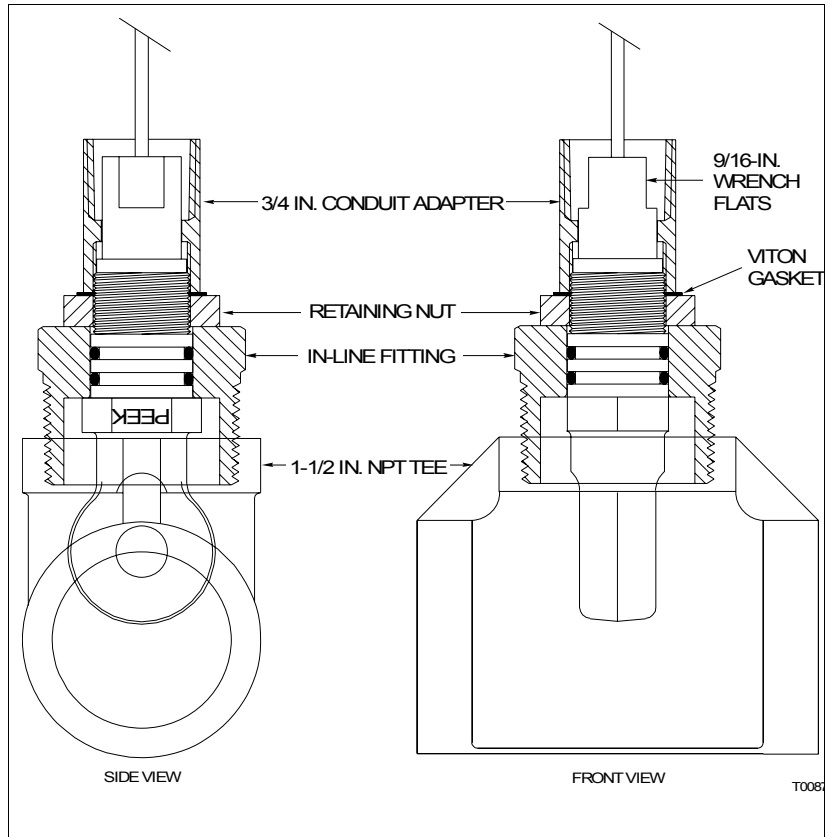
In-Line Assembly in Pipe or Tank Fitting
